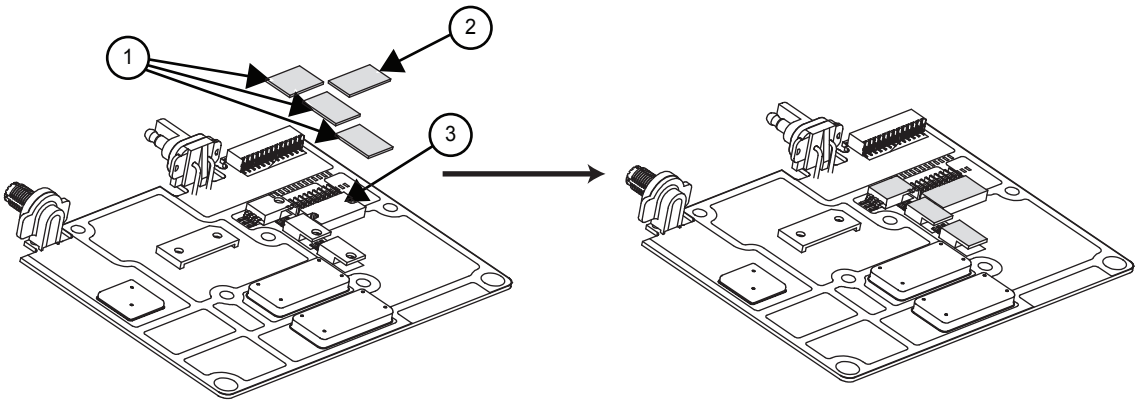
Thermal Pads and Shield Gasketing on Chassis and Die Cast Cover
